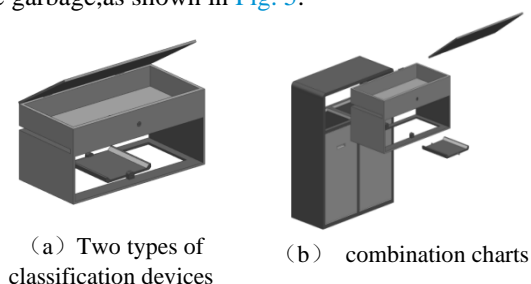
Exploded view of installation of two types of garbage sorting devices
